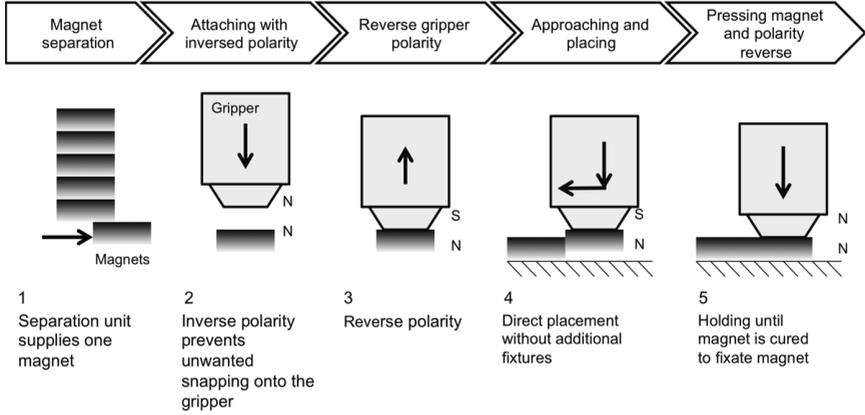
The assembly process with the ELMAG gripper system consists of five steps.
